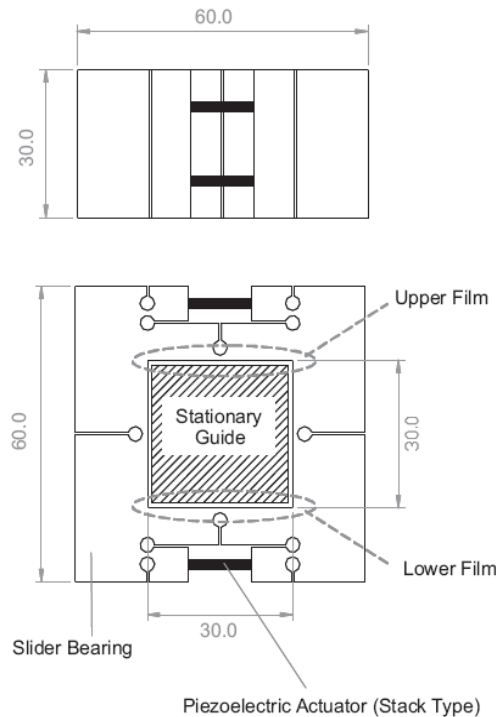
Proposed squeeze film test bearing running on a square slider guide [23].
